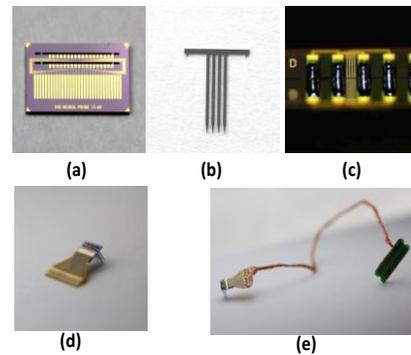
(a) Si platform, (b) Si probe, (c) Solder joint between platform and probe, (d) Si platform assembled on FPCB, (e) The assembled fabricated device.
